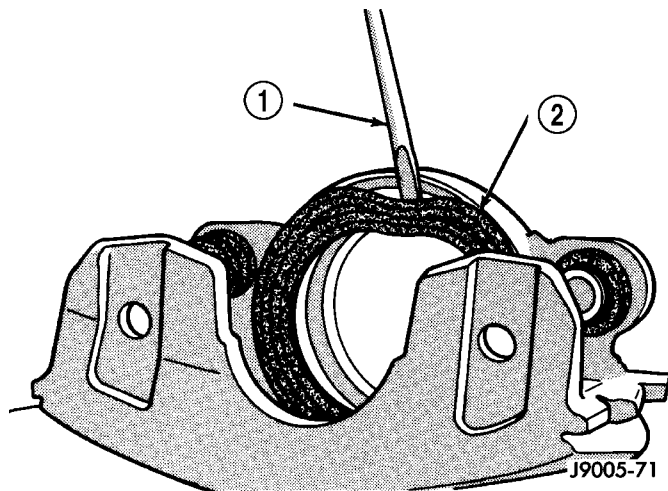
CALIPER PISTON DUST BOOT REMOVAL - TYPICAL
